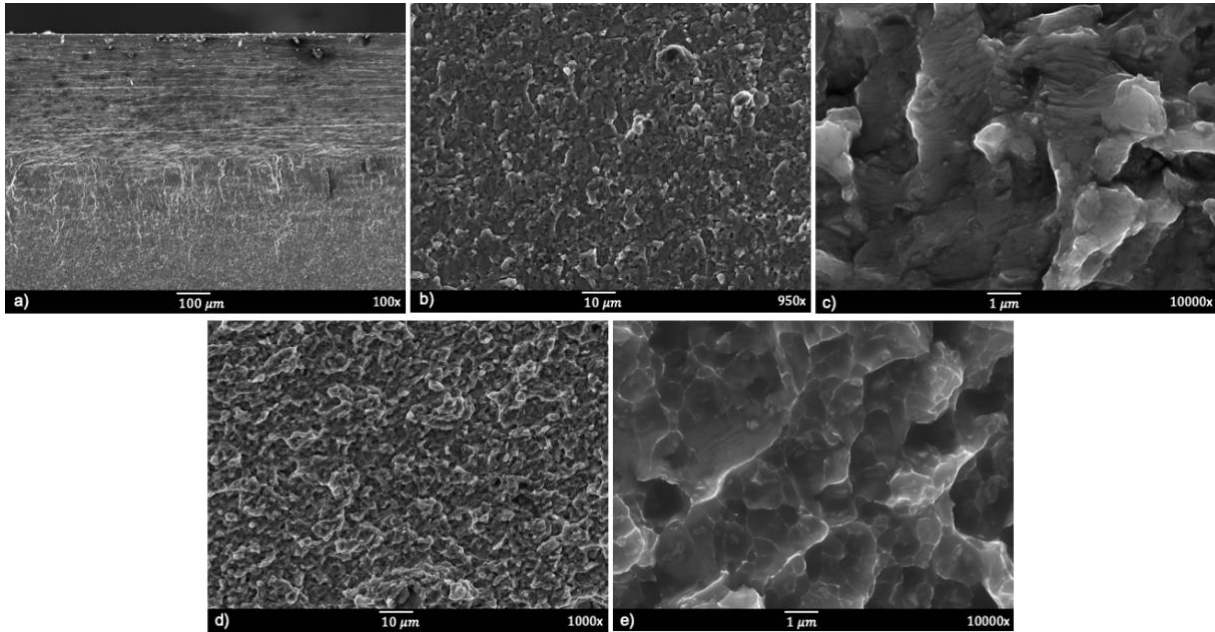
L3-1 fractographies: a) crack initiation region, b) crack propagation region, c) fatigue striations, d) final fracture region with visible dimples, e) detail of d).
